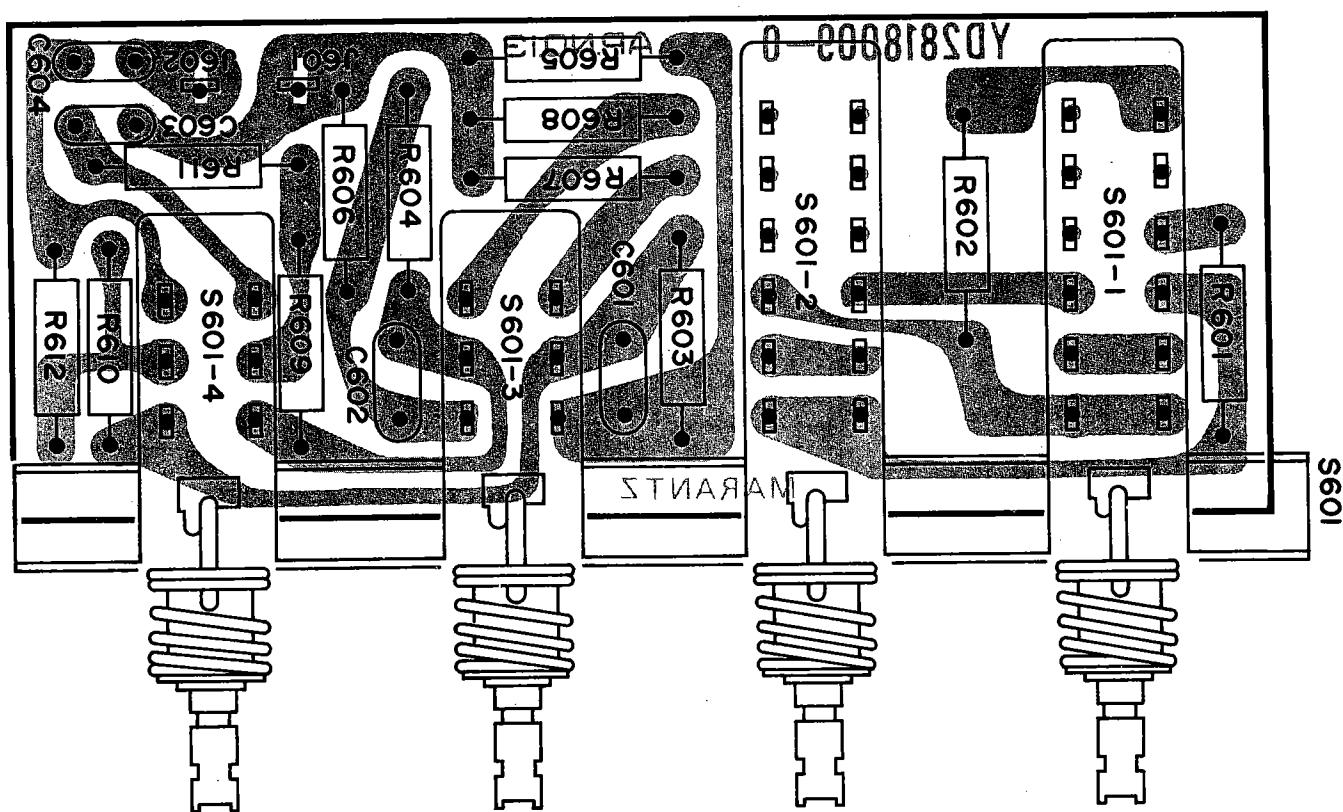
Mono, High and Low Filter Switch Unit Assembly P600 Component Locations
